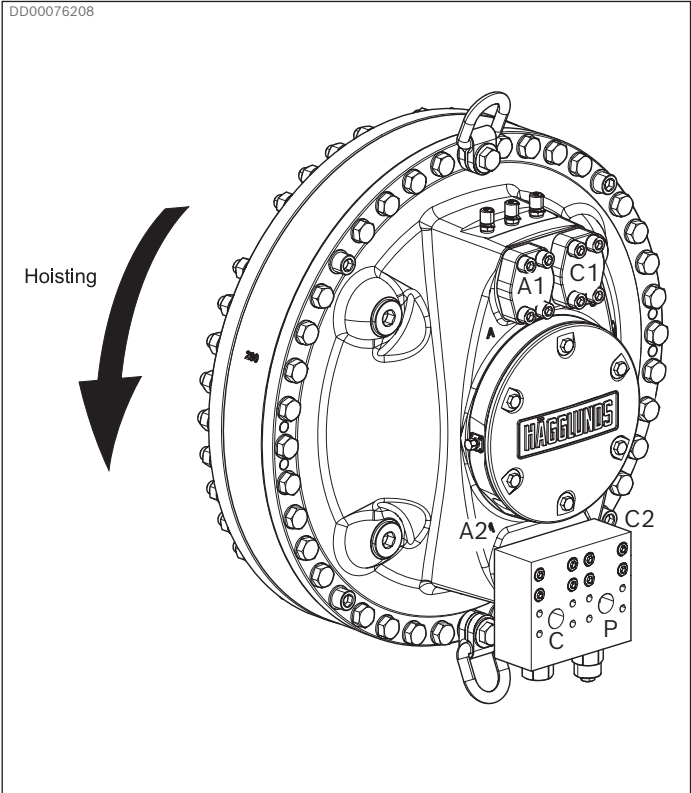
Example Quantum configuration C: High pressure in P valve / C2 motor (Hoisting), motor shaft rotating clockwise viewed from the motor shaft side. Lowering in C valve / A2 motor port
